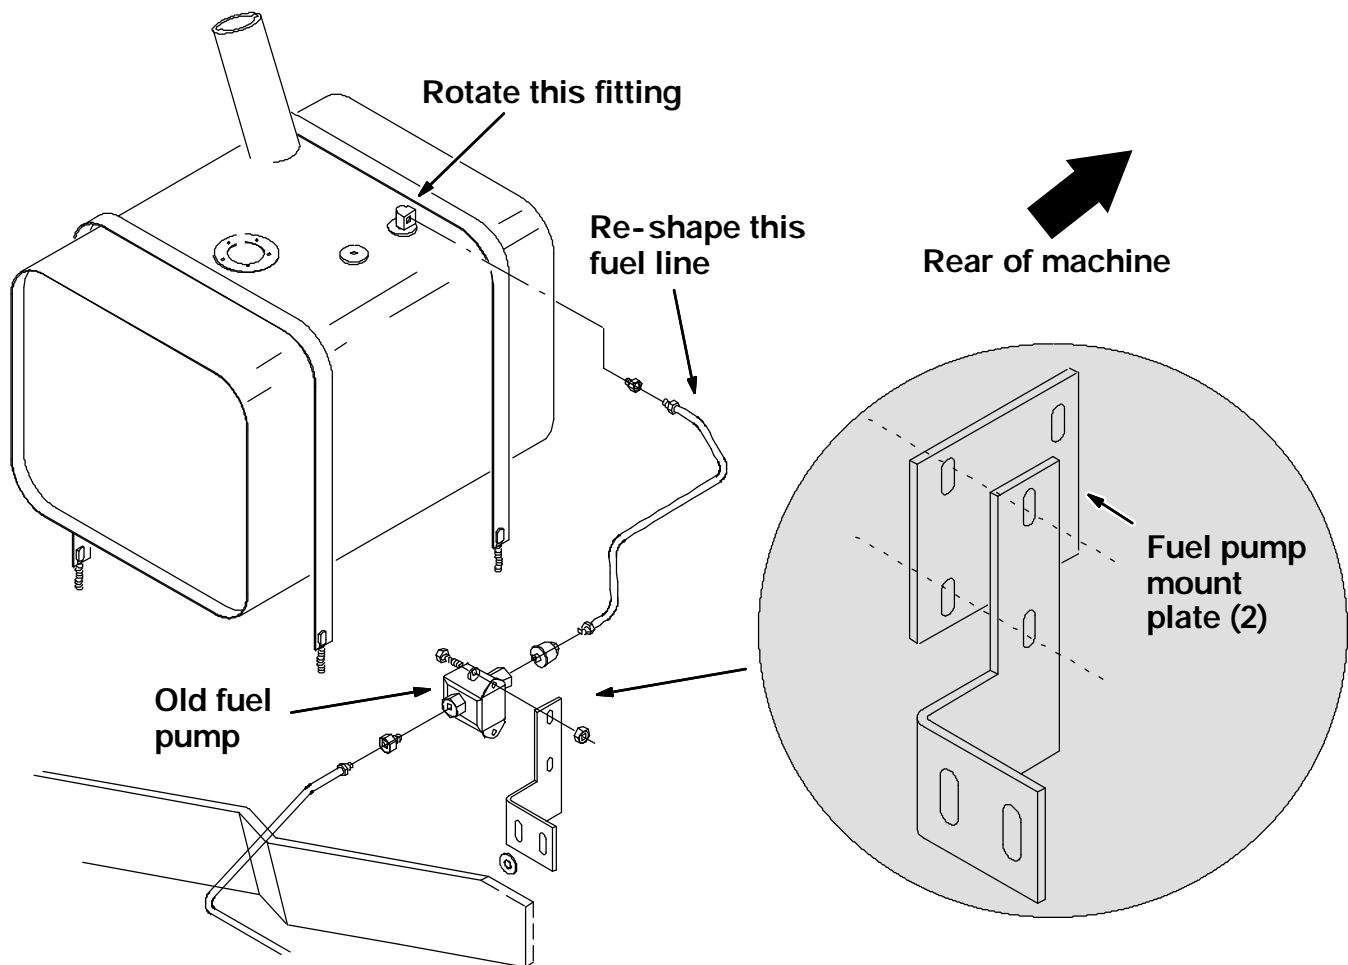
800/810 Diesel Fuel Pump Installation
